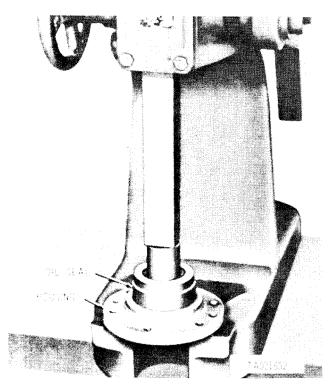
Pressing oil seal into fan drive oil seal housing.
